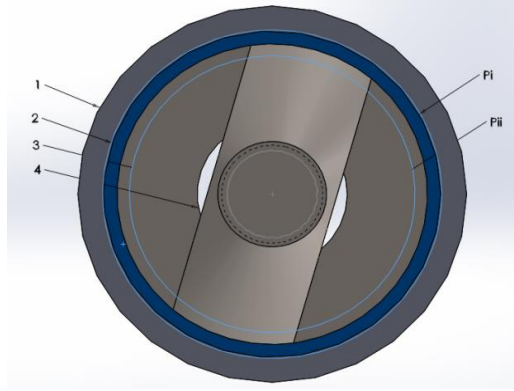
Assembly of check seat,PTFE cup, and suction tube.
